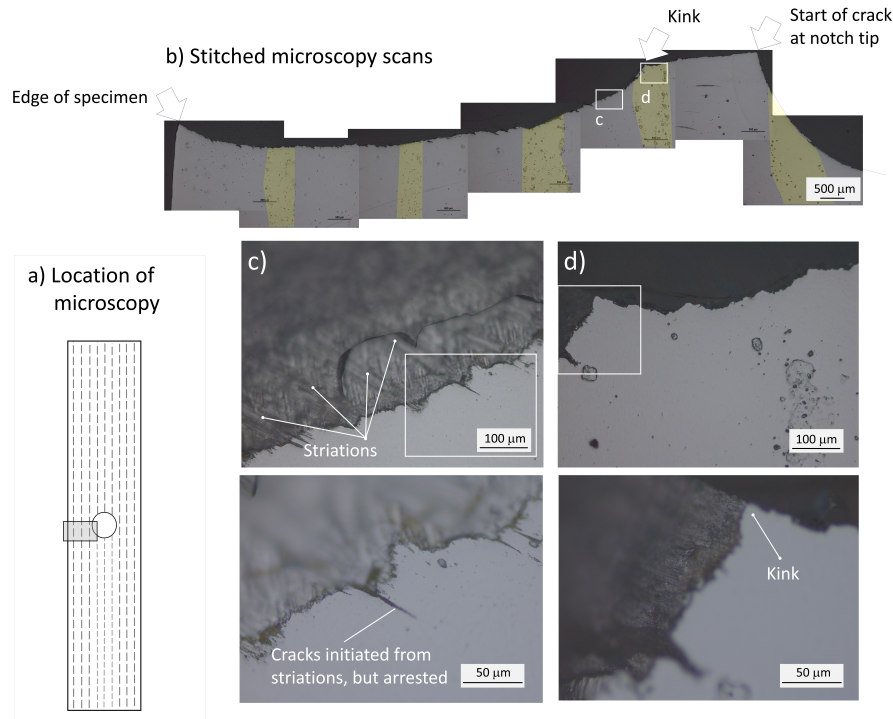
Fatigue fracture of WAAM LMC specimen; (a) location of microscopy; (b) microscopy scans of crack path; (c) striations on fracture surface; (d) kink (Spalek et al., 2021).
